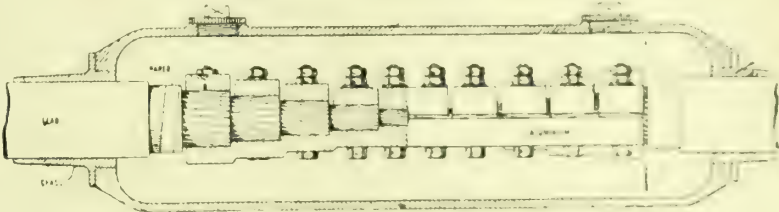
JOINT FOR 1.66 SQ. IN. ALUMINIUM CABLE.
